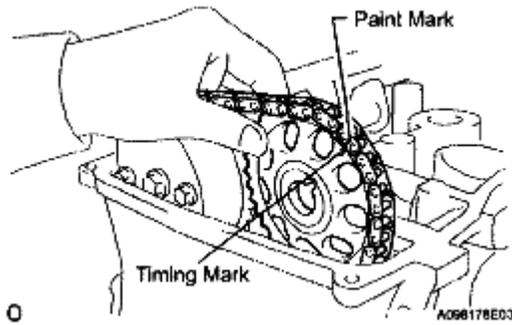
Aligning With Timing Mark On Camshaft Timing Sprocket
